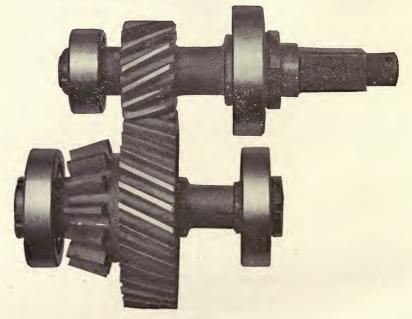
White $1\frac{1}{2}$ Ton Double Reduction Axle with Helical Cut Spur Gears.
